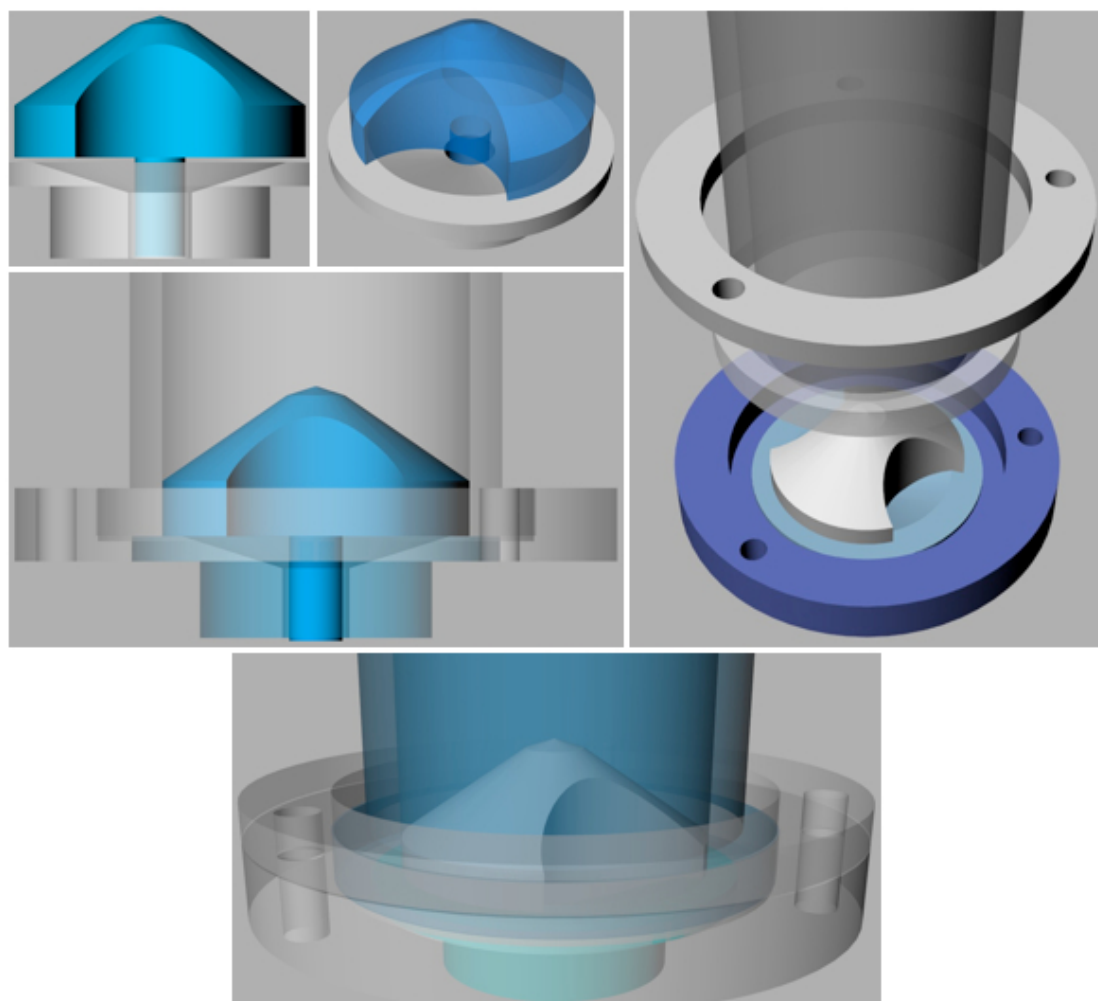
Technical drawings of the spider-die system for extrusion of tubular supports.
